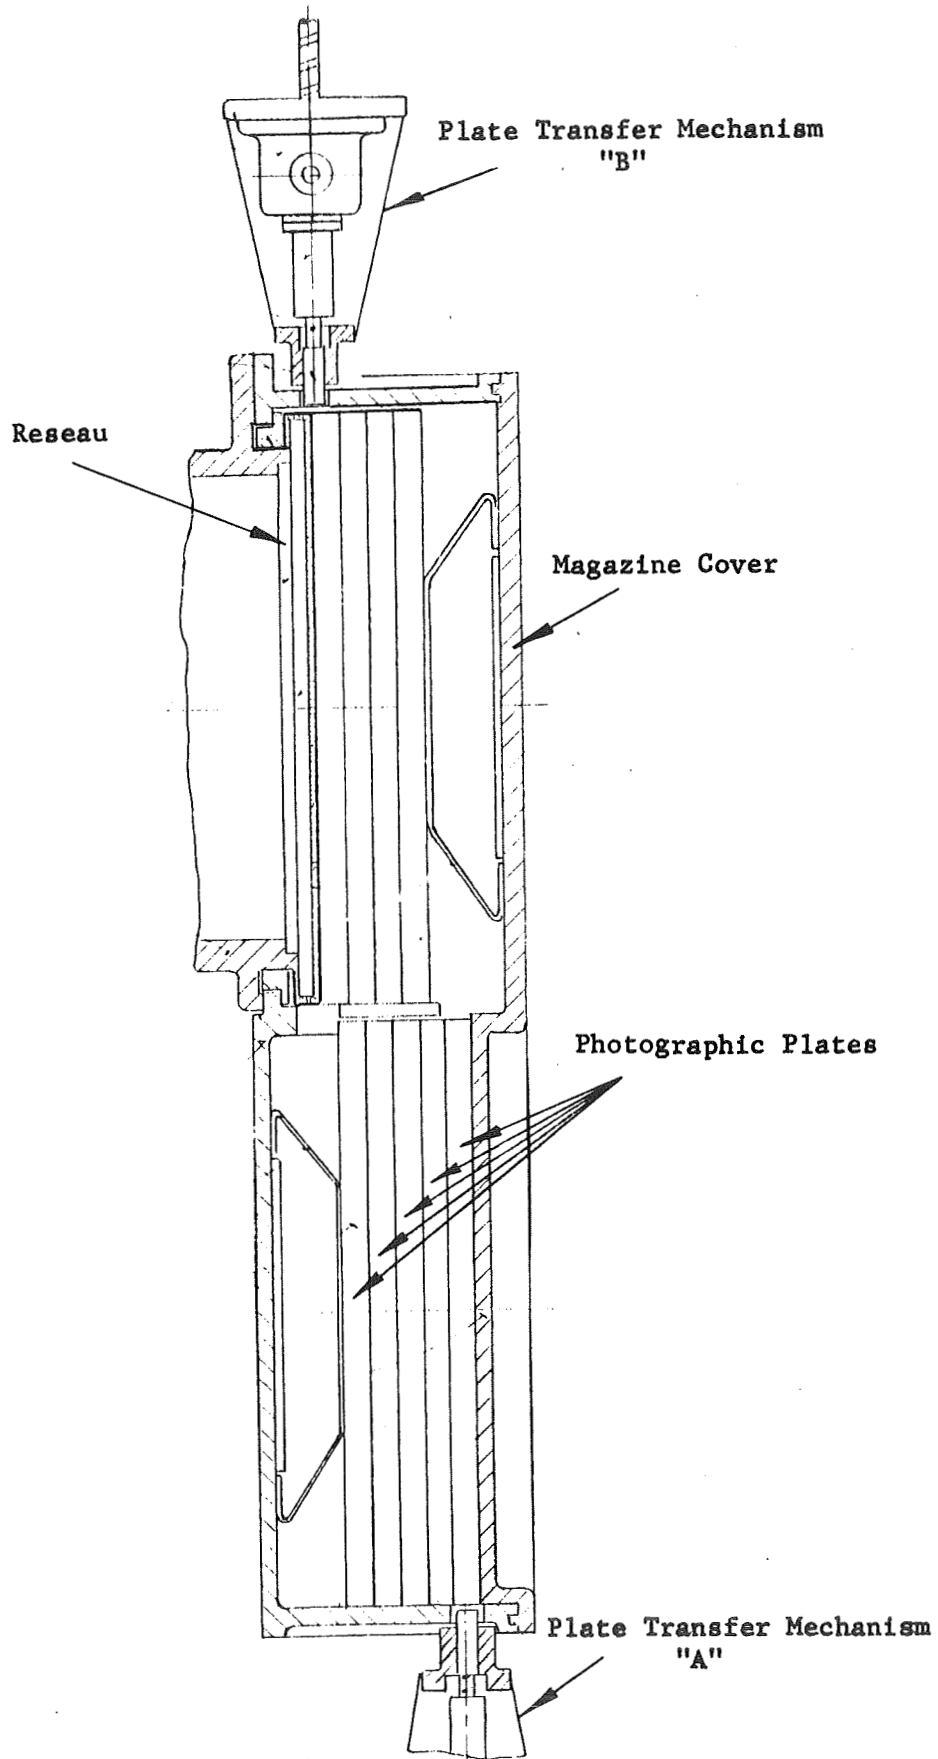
, Plate Magazine and Transfer Mechanism, Exposure Position
